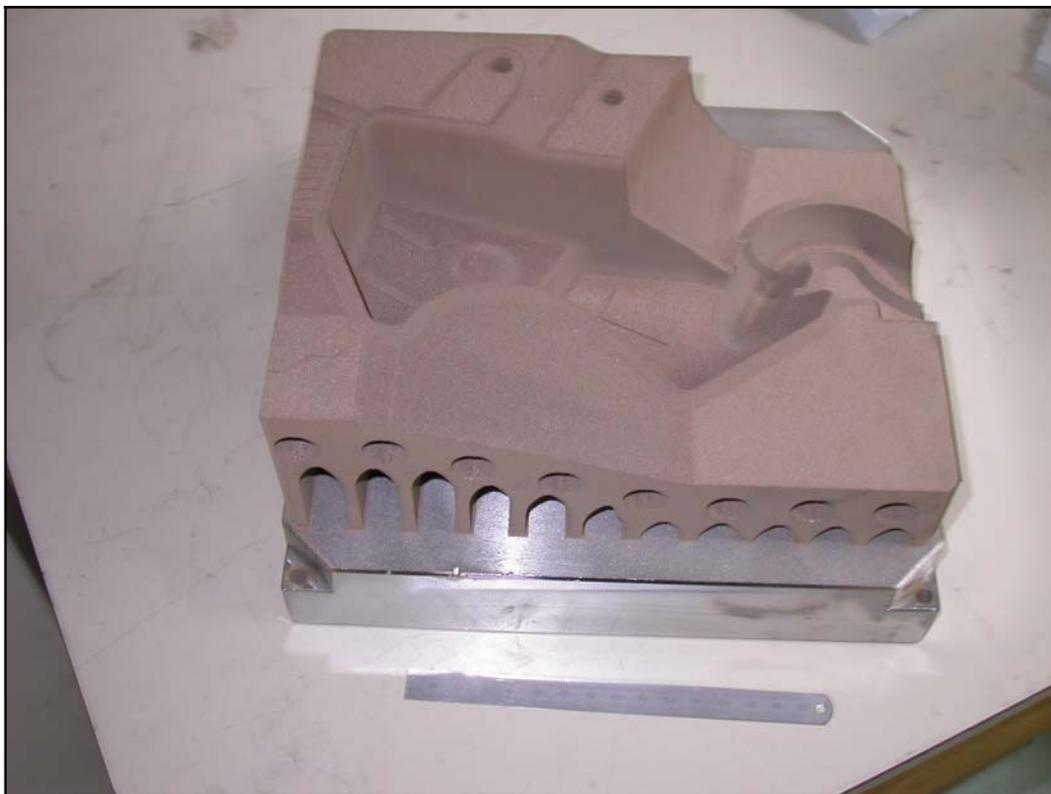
DMLS blow moulding tool part in DirectMetal 20, with buttressing to reduce tool weight and manufacturing time. Above the buttressing can be seen the openings to the incorporated cooling channels.
